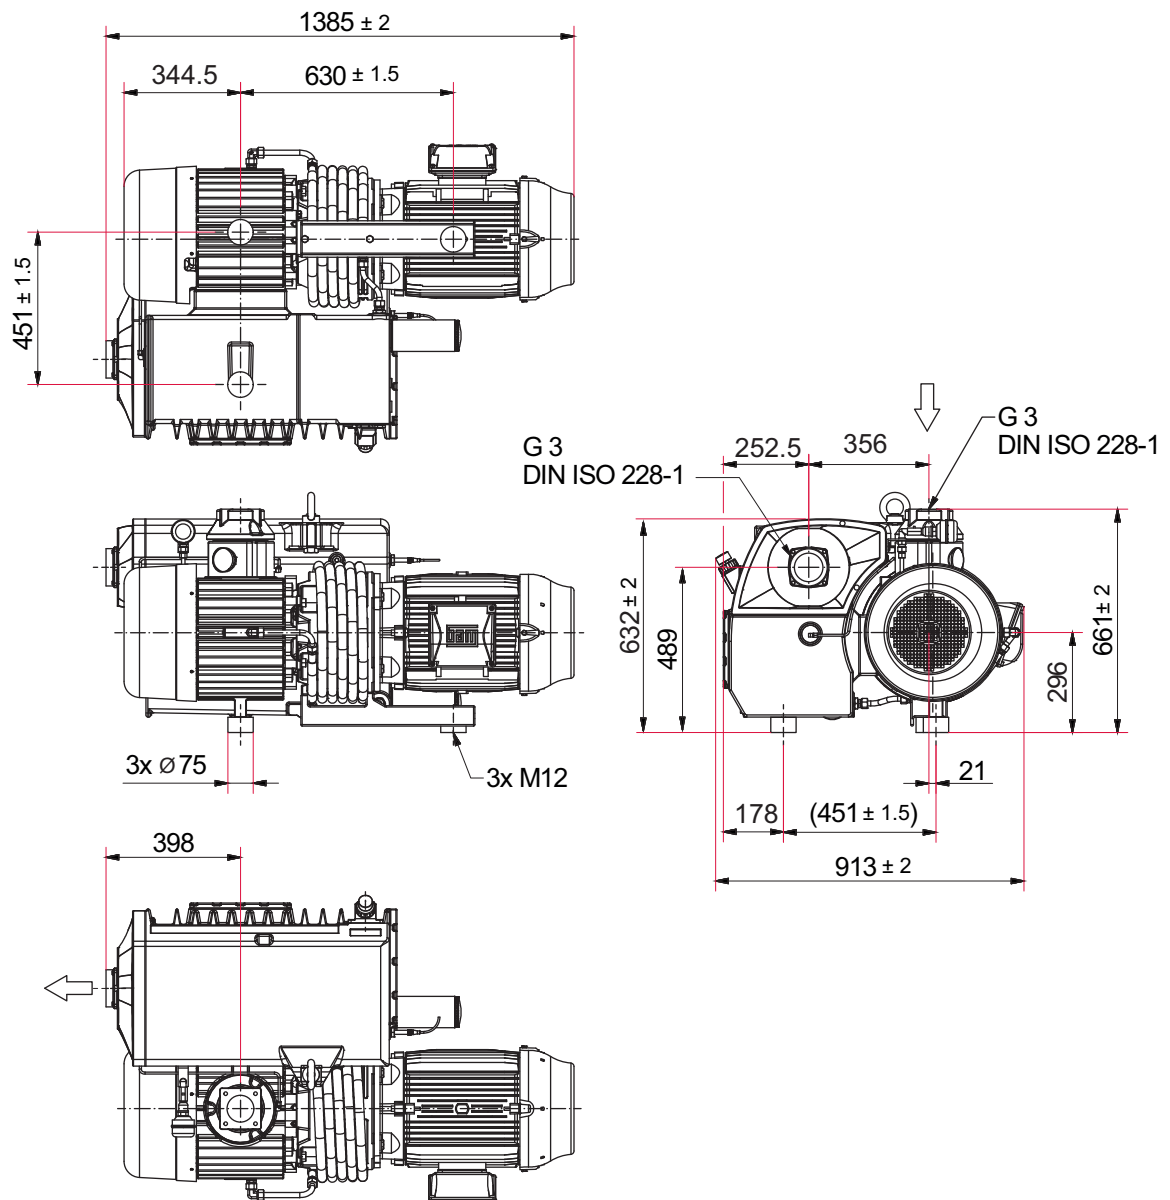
Dimensions Hena 401 | Three phase motor IE3
